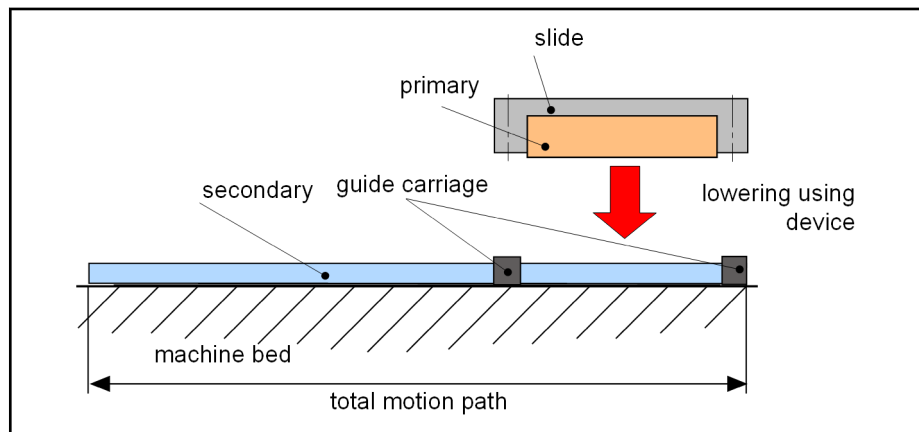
Installation of linear motor components at a path with several secondary parts
